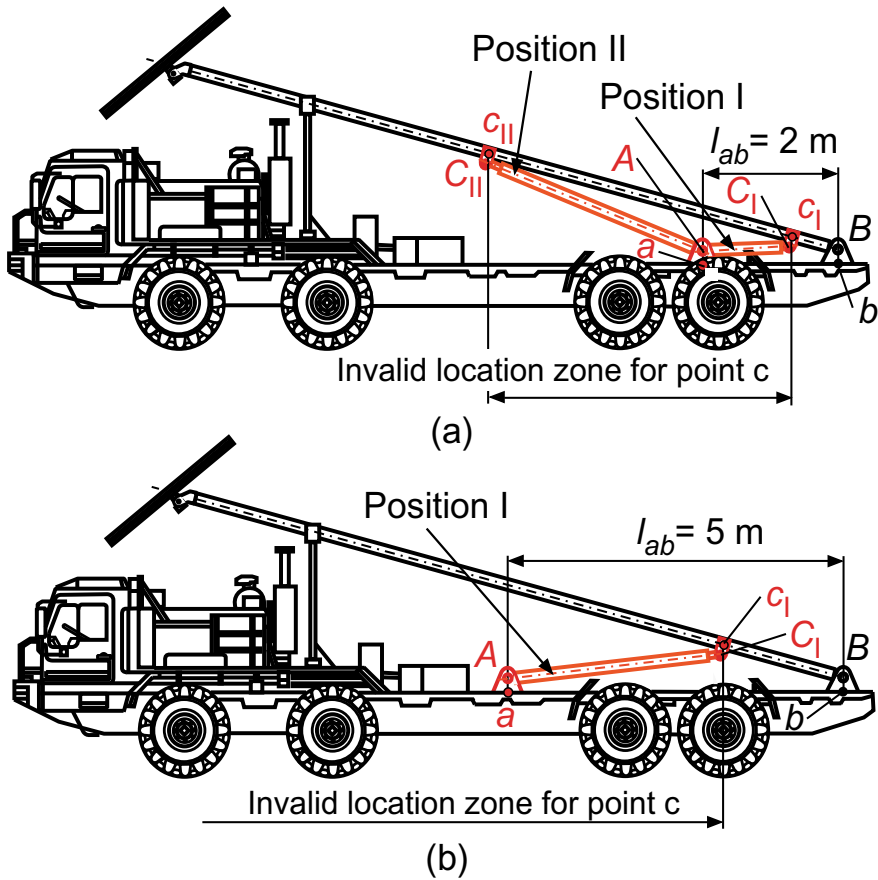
Zones of possible layout of the lifting hydraulic cylinder at the terminal or central location of the end tower
